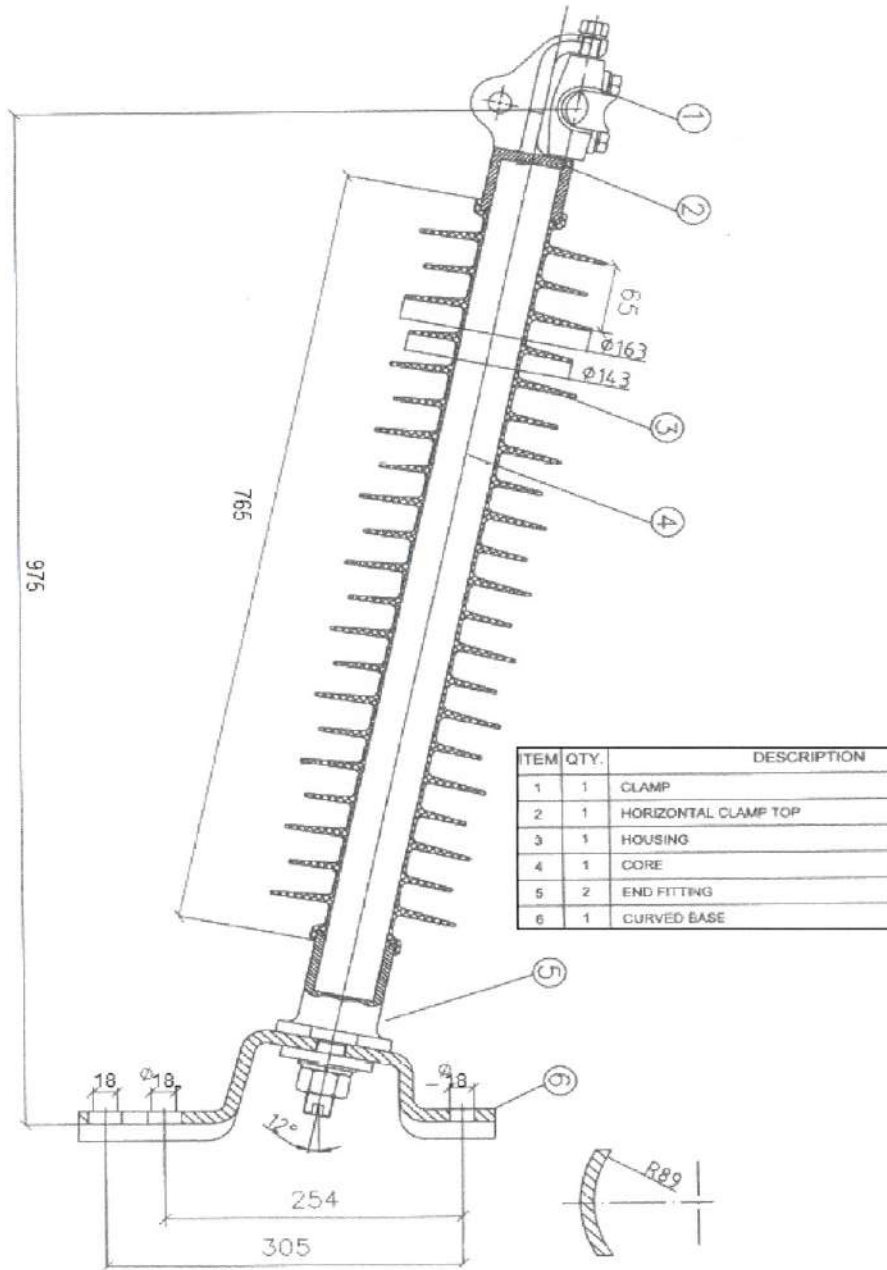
Assembly Parts for a 72.5kV Horizontal post insulator (for poles)
